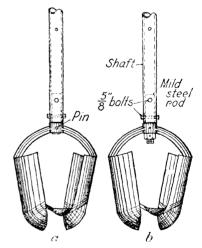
The Iwan auger. a, Shaft attached to auger arch; b, a more solid joint with a nut below the socket. The bolts and nuts are not necessary if the shaft is welded to the arch.
